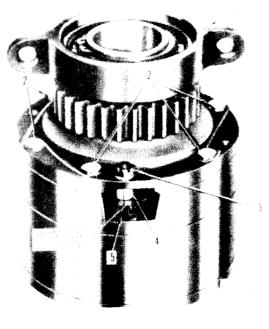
Pressing drive gearshaft ball bearing on drive gearshaft.
